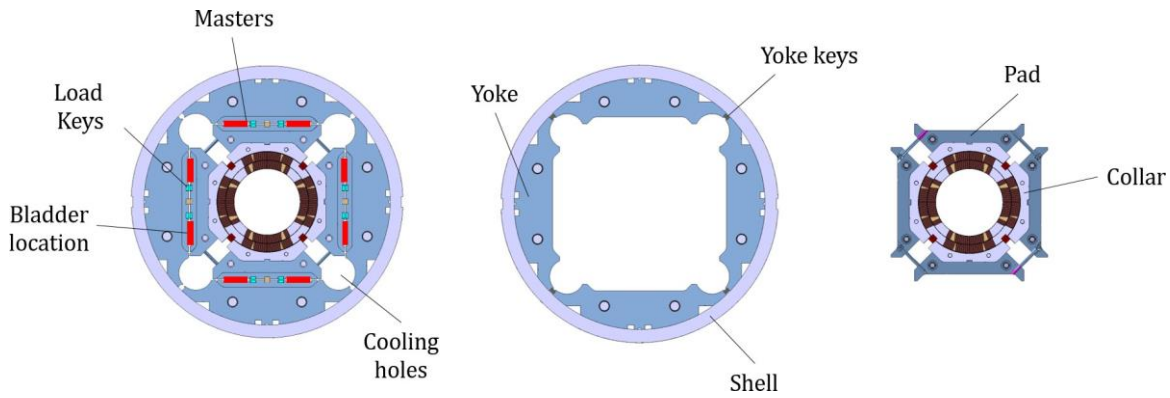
MQXF magnet assembly: Full magnet (left), yoke-shell sub-assembly (middle) and coil-pack sub-assembly (right). The most relevant components are labelled accordingly. The position of the bladders is highlighted using red rectangles.
